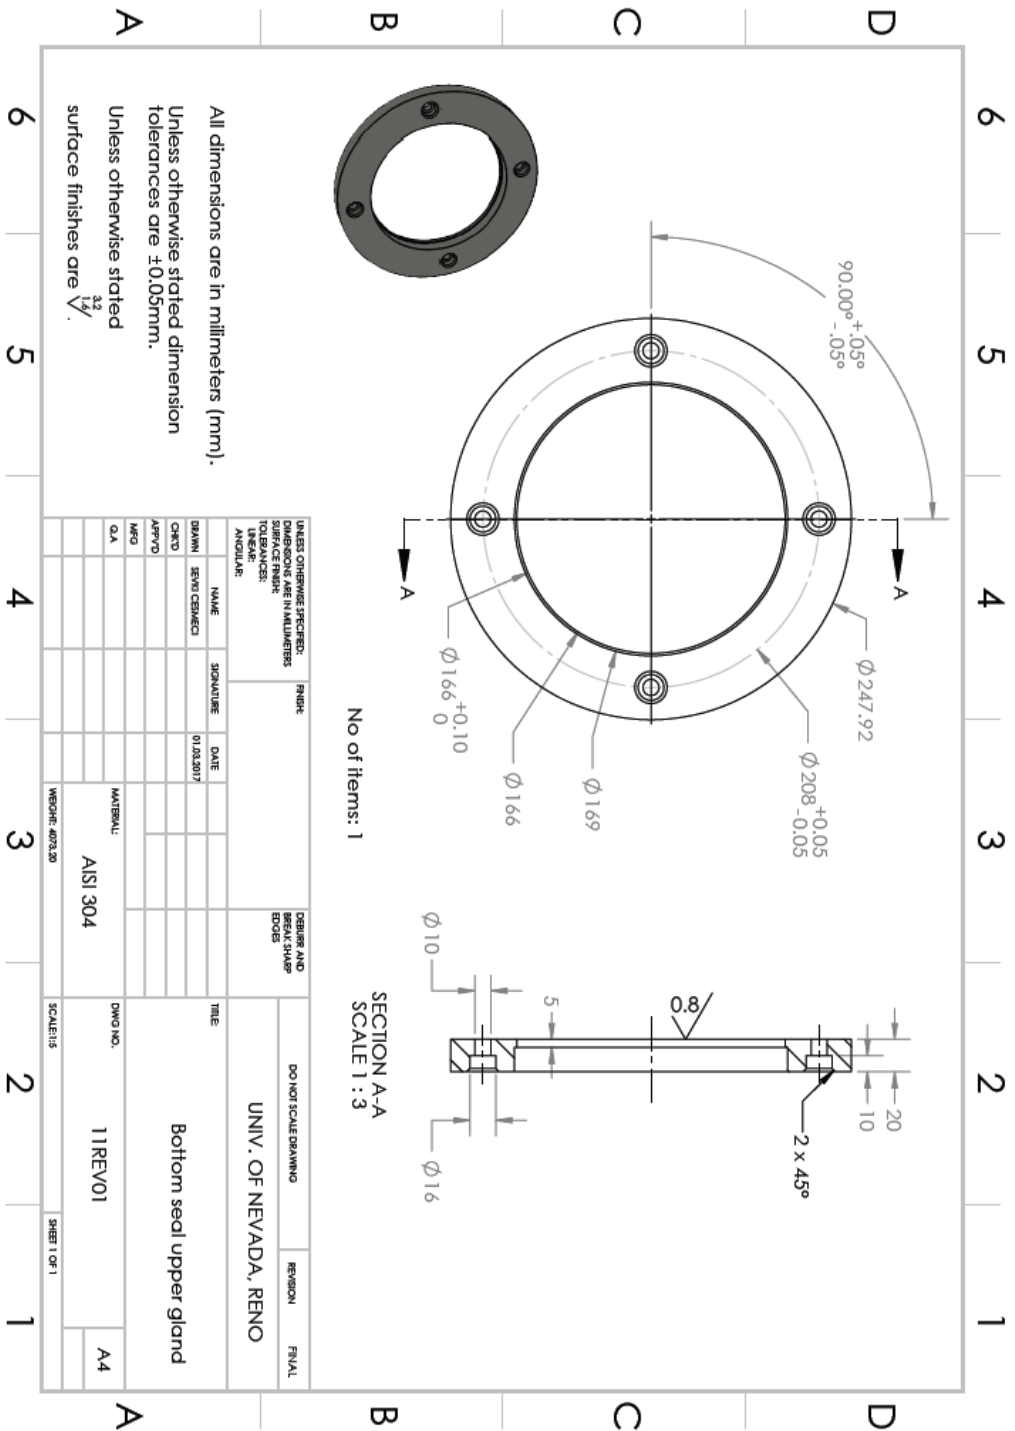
2D technical drawing for the bottom seal upper gland.
